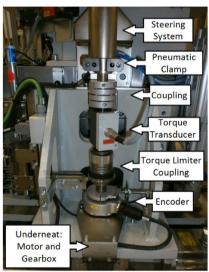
Machine that performs the end-of-line test composed by a servomotor, a gearbox, an encoder, a torque transducer and a pneumatic clamp to hold the intermediate shaft of the steering system.
